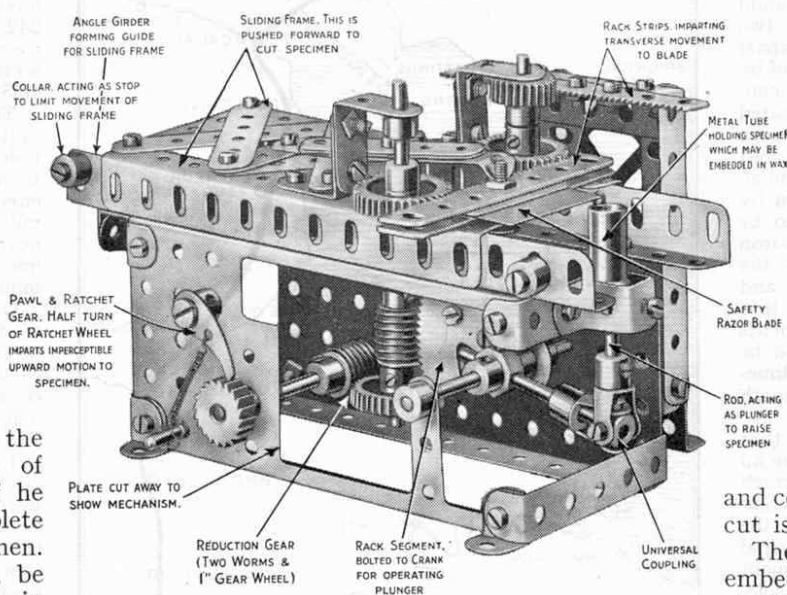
View of Microtome with side Plate partly cut away to show the gearing operating the plunger, etc.
